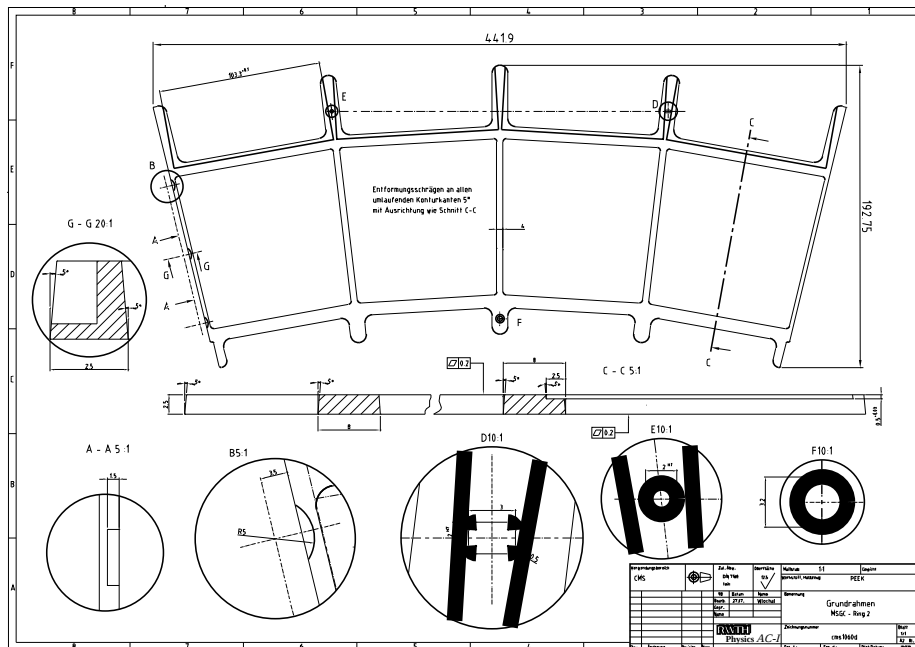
Technical drawing of the bottom frame of an mf2 module.
